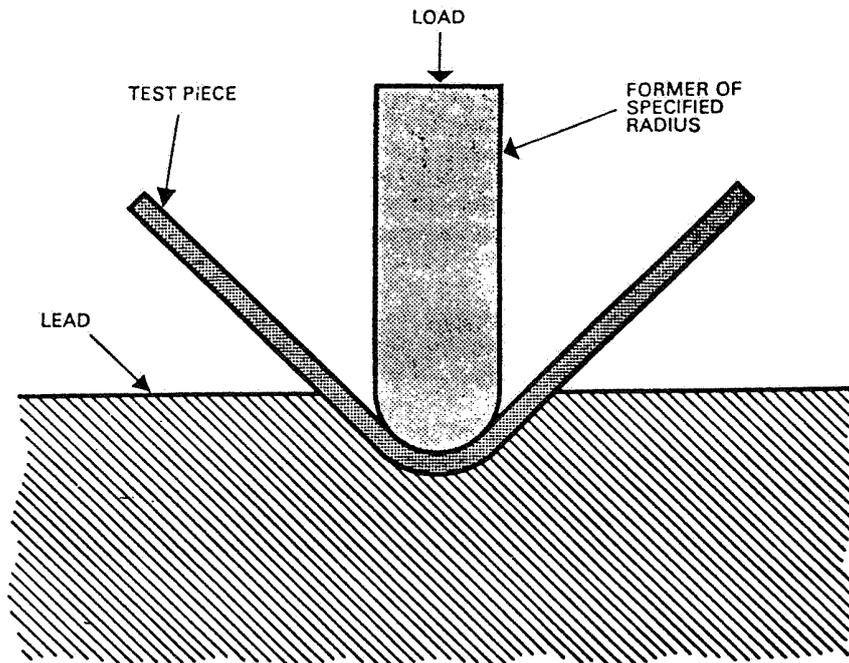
FORMING BEND TEST PIECE WITH LEAD BLOCK AND FORMER
